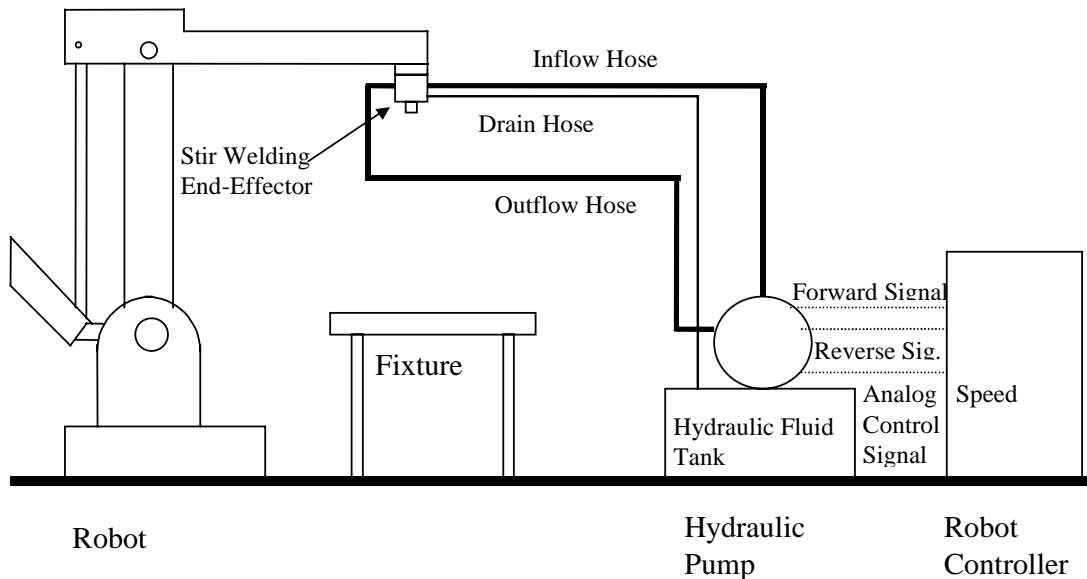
Robotic Friction Stir Welding System Diagram
